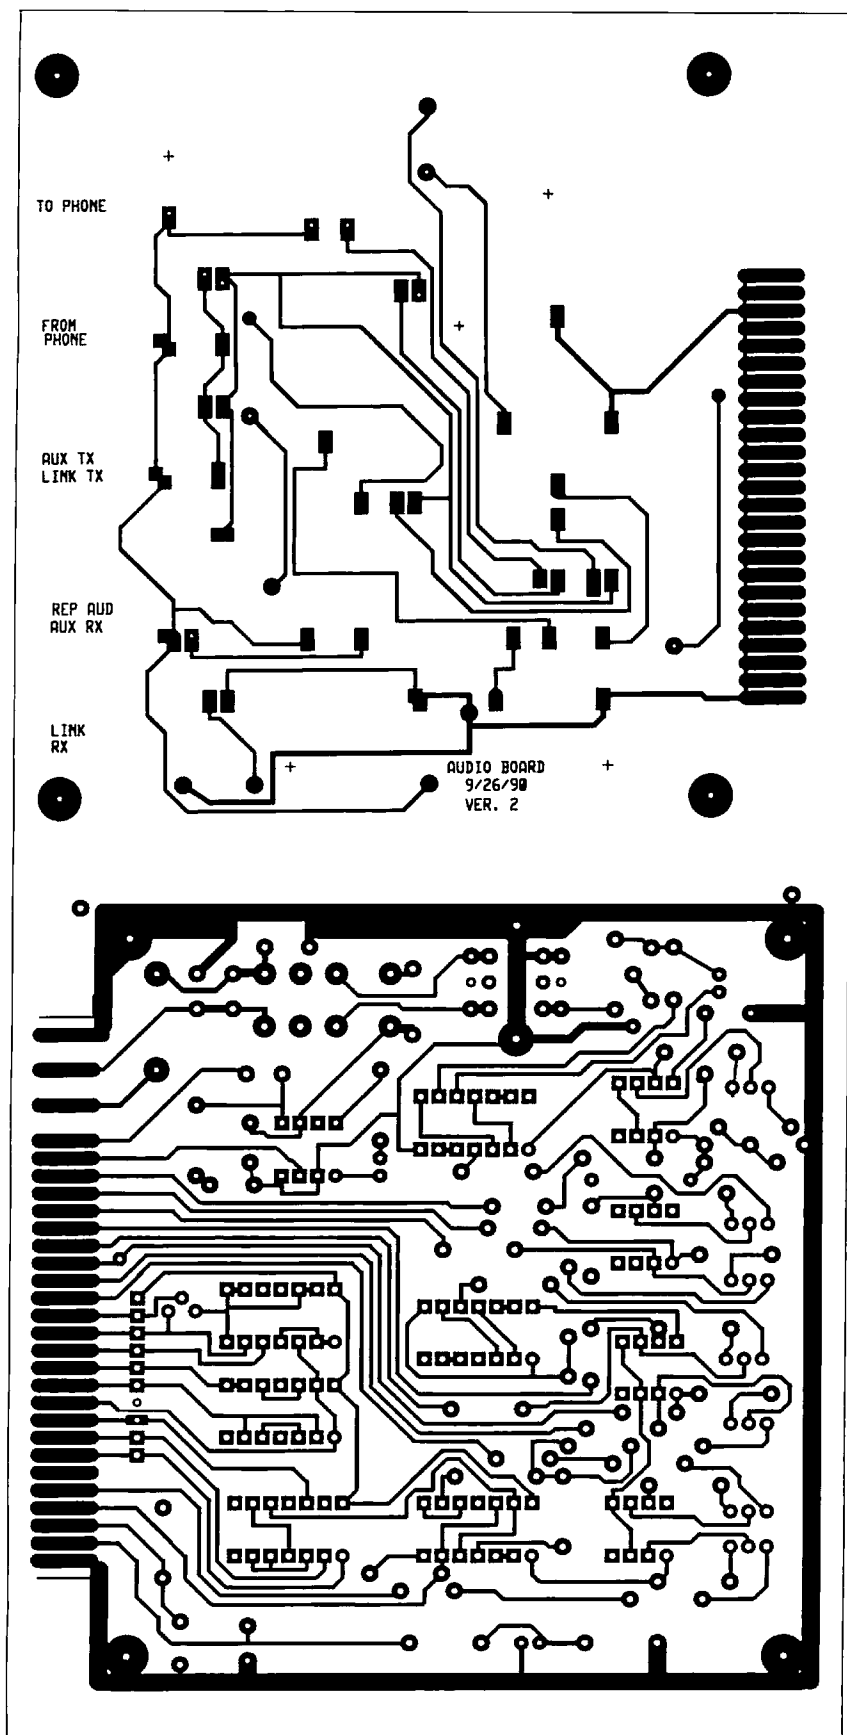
PC foil patterns for the audio board. (a) Top layer. (b) Bottom layer.
